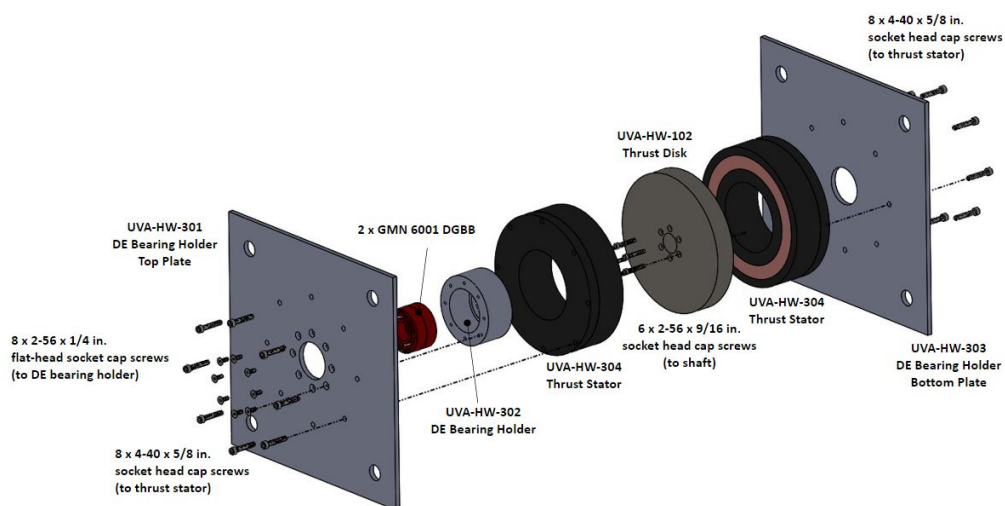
Thrust AMB / DE Backup Bearing Assembly
